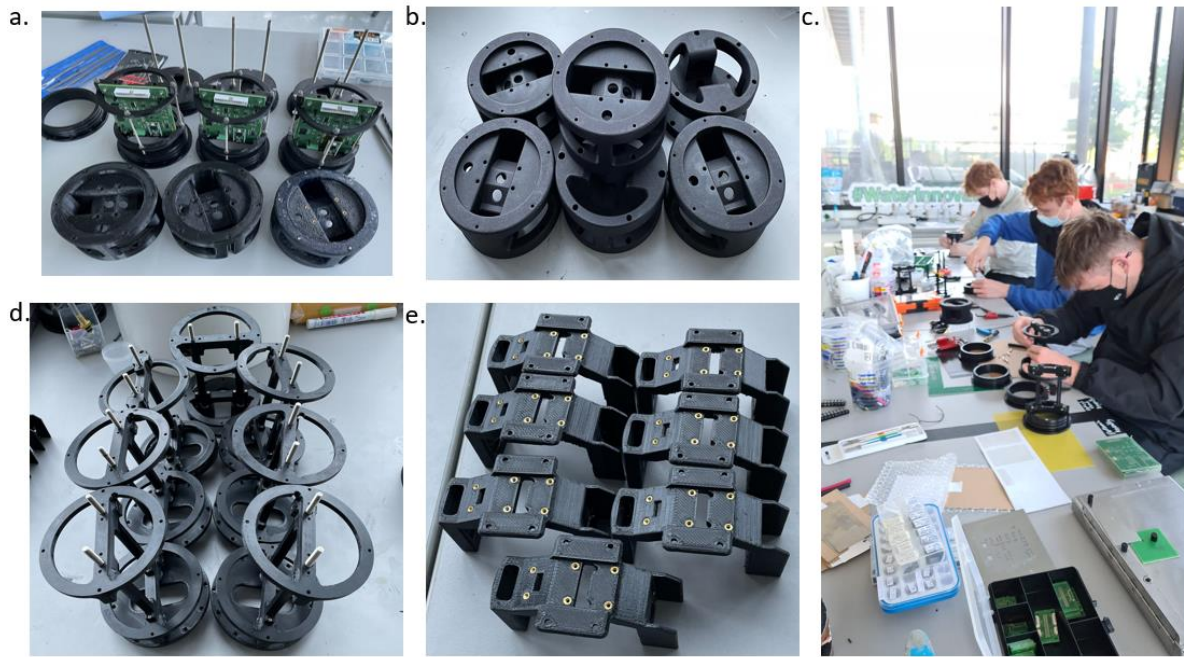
Assembly line and stations of sensor unit assembly method (a) mounting controller circuit boards to internal frame structures (b) SLS printed optical heads before optical components are mounted (c) Assembly line in the laboratory with different assembly stations for each subsystem outlined. d.) Internal frames assembled before insertion into the marine sensor enclosure and electronics mounted. e.) Optical electronics mounting tray for optical head before measuring electronics are mounted.
